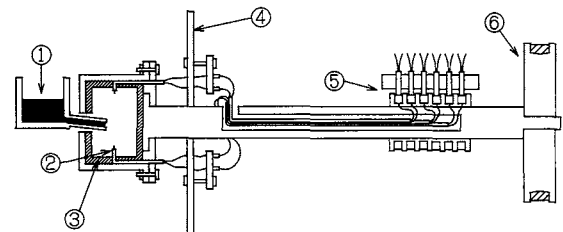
Schema of mold and main shaft of the centrifugal caster. ① Melt. ② Thermocouple. ③ Mold (insulation brick). ④ Heat-shielding plate. ⑤ Slip ring. ⑥ Pulley.
